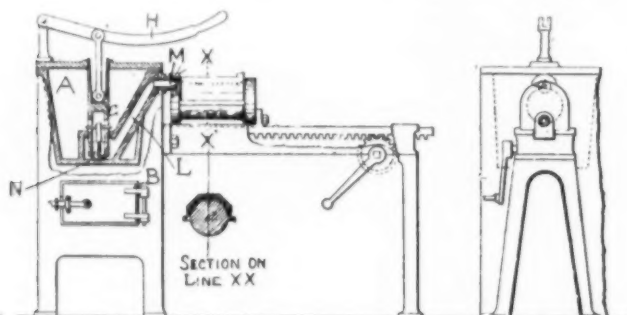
DUSENBURY BROTHERS' DIE-CASTING MACHINE.
